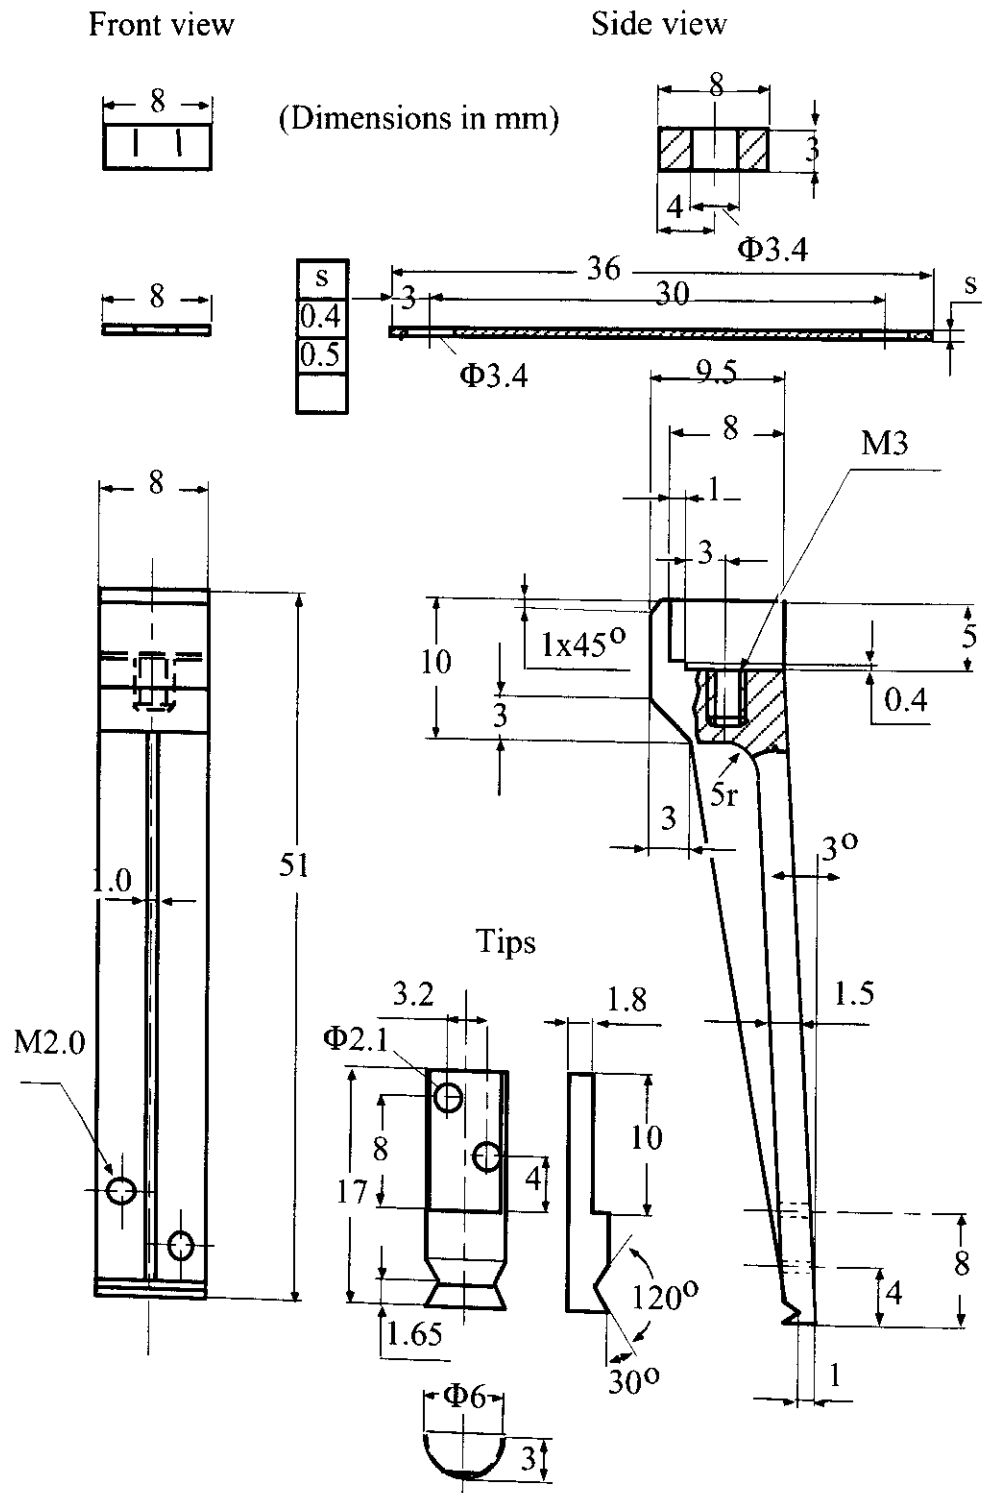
Detail drawings of CMOD gauge [A3.1, A3.2].
